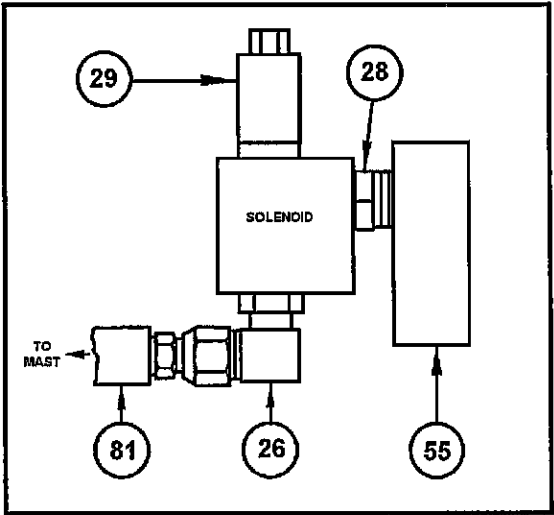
Hydraulic Assembly, p/n: 10550-05-N (sheet 2 of 4)
